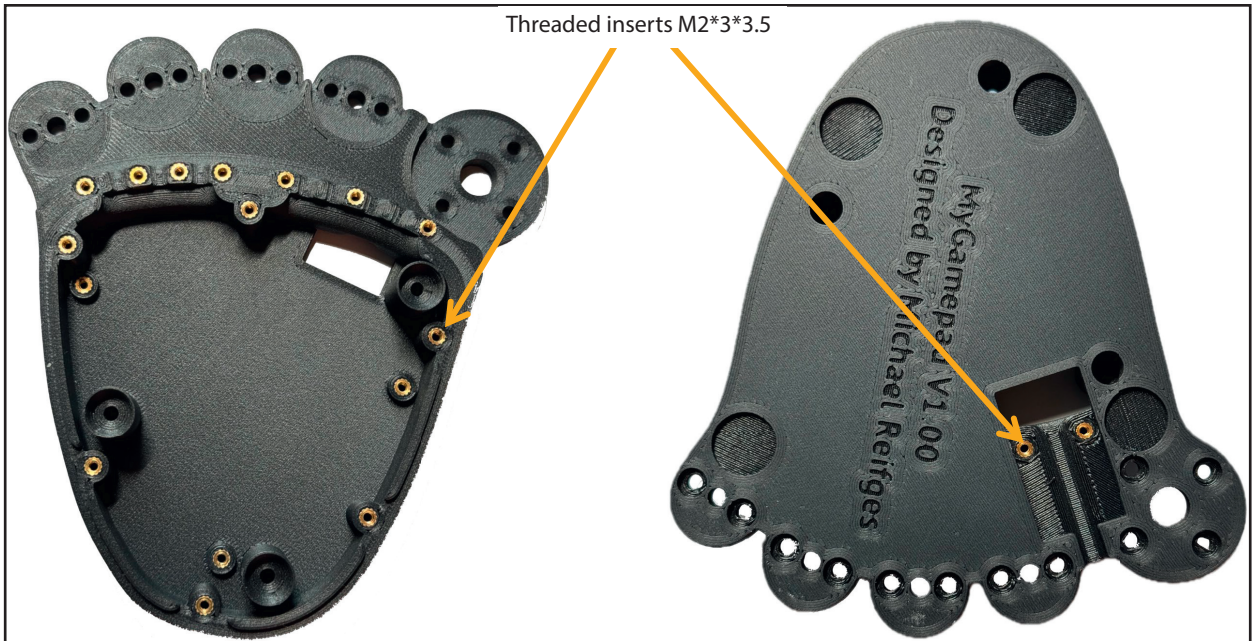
Placements of threaded inserts on Thumb-Stick-Upper-Housing.
